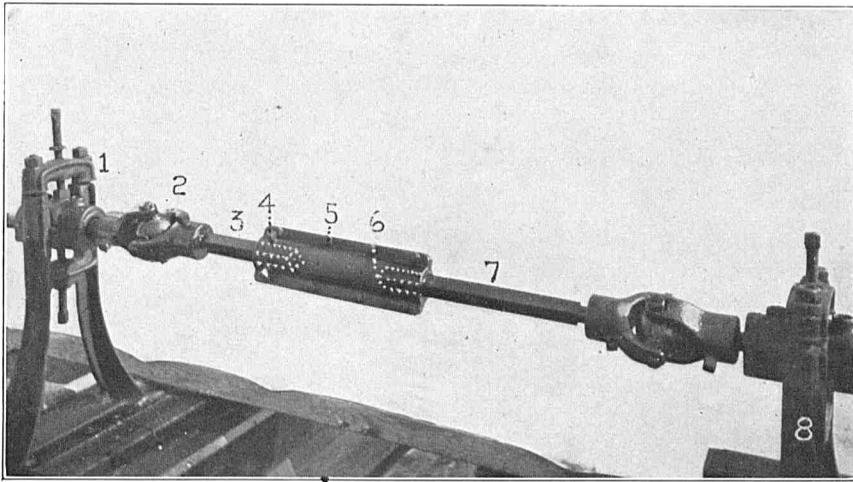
Detail of device for extension and universal movement. 1, adjustable shaft hanger on house boat; 2, ball joint; 3, square shafting, fastened by set screws into ball joint at left, and also (4) into sleeve; 4 and 5, screws through flanges of sleeve; 6, oil holes; 7, square shaft which slides in and out of sleeve; 8, shaft hanger upon side float.
